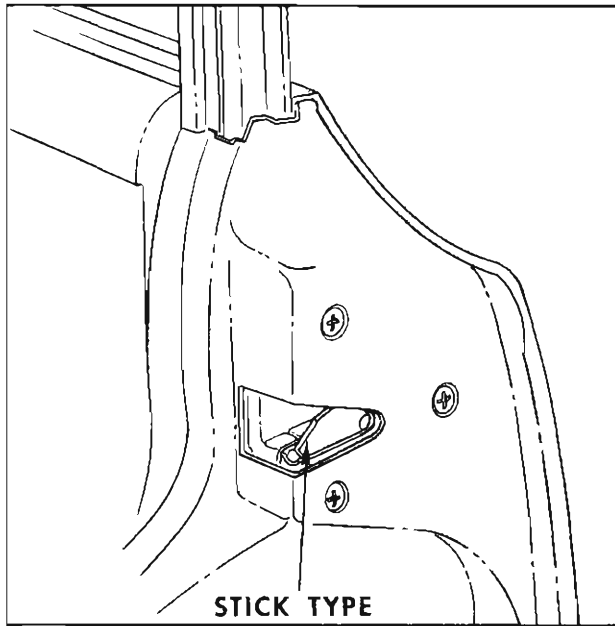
Door Lock Fork Bolt Lubrication (3000, 3100 & 3200 Series)
